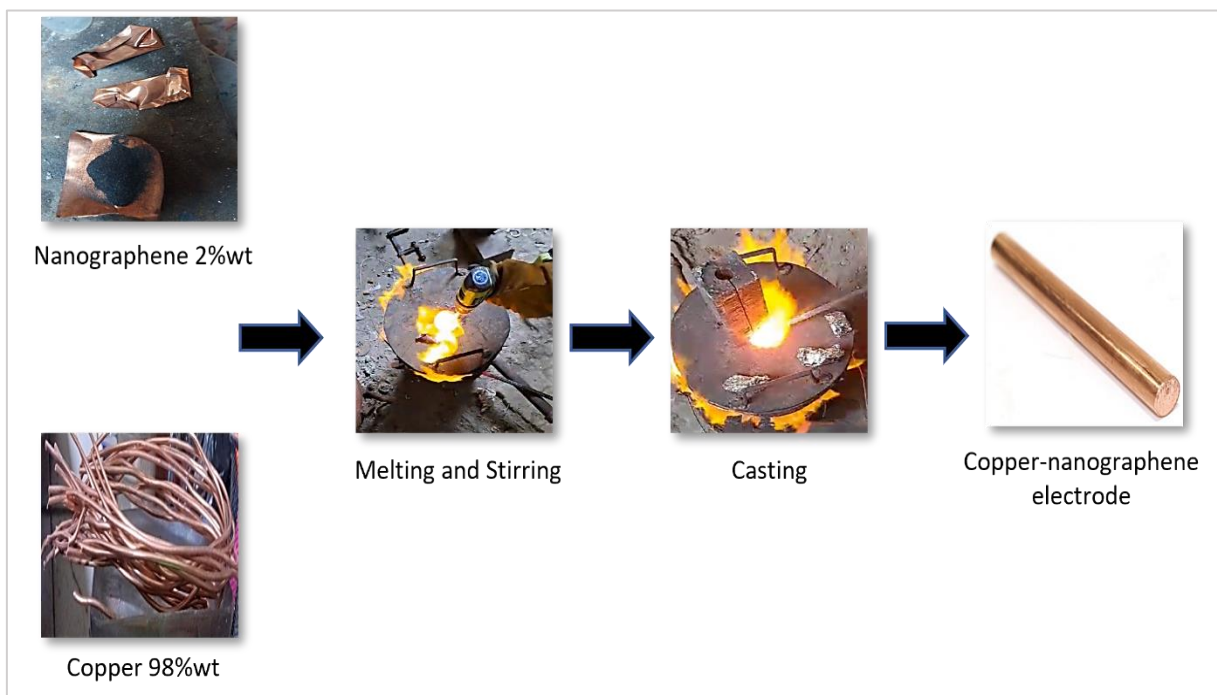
Fabrication steps of copper-nanographene using stir-casting
